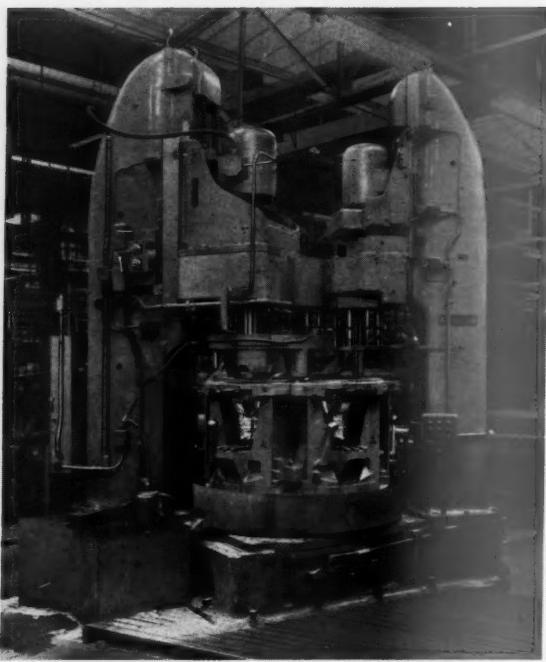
Footburst five-station, 57-spindle drilling, reaming and tapping machine for gearbox casings
